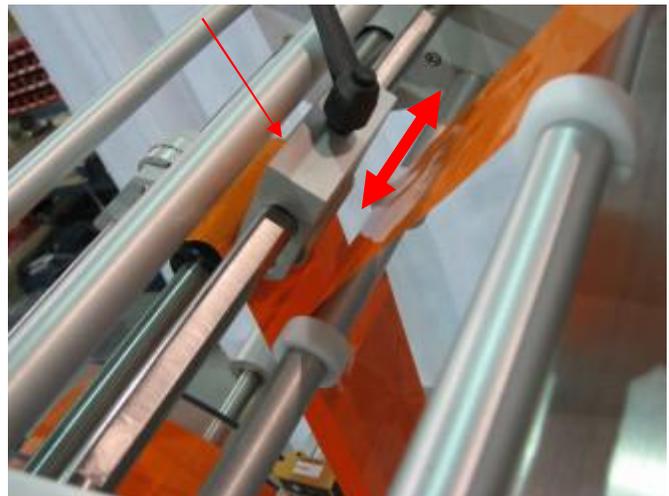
Push Up on Drive Roller and tighten with its toggle handle.
